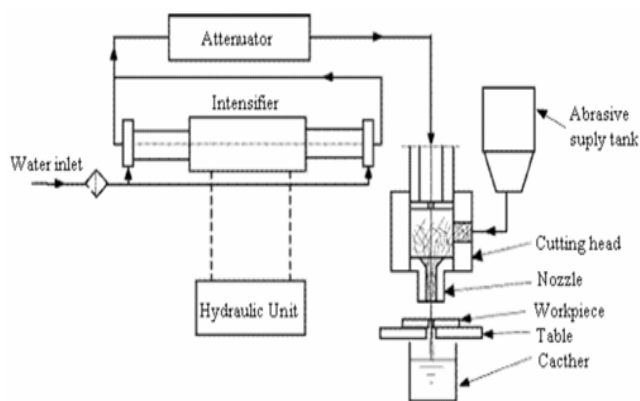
A Schematic Illustration of an Abrasive type Waterjet Cutting System
